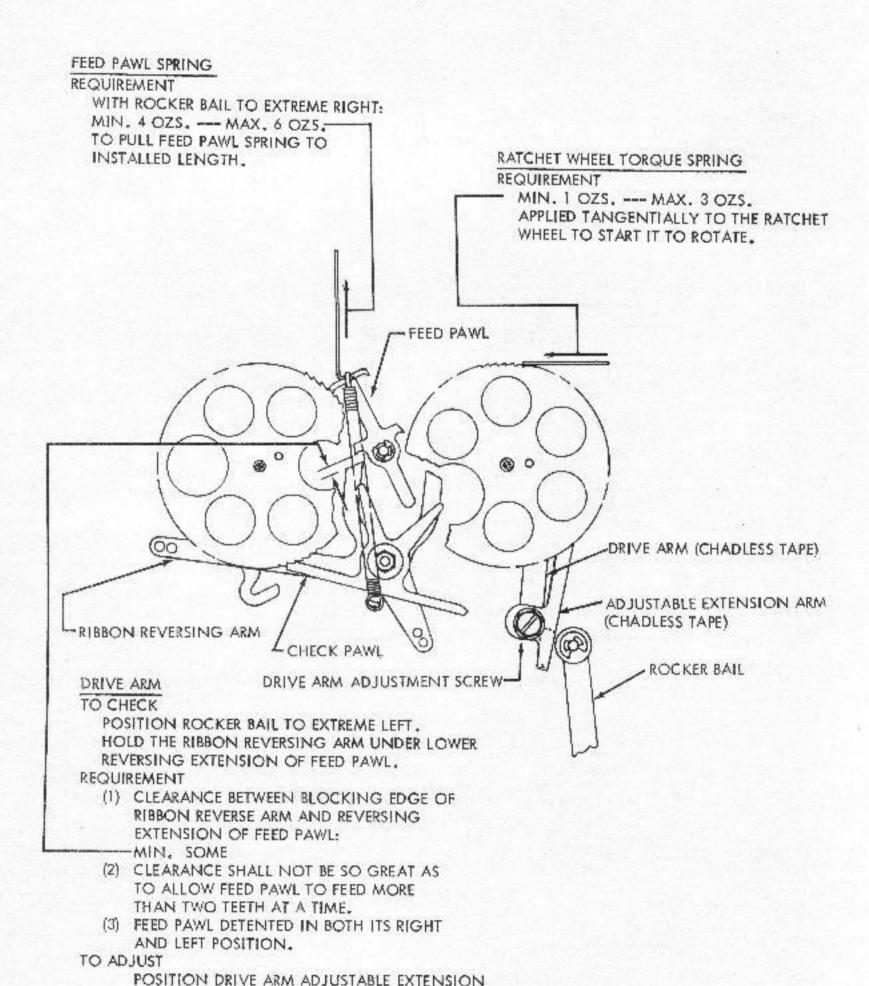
RIBBON FEED MECHANISM LATEST DESIGN
